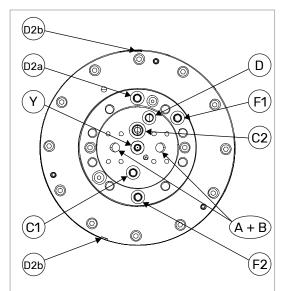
The hydraulic connections of a 2-speed C223 motor with a double brake.
